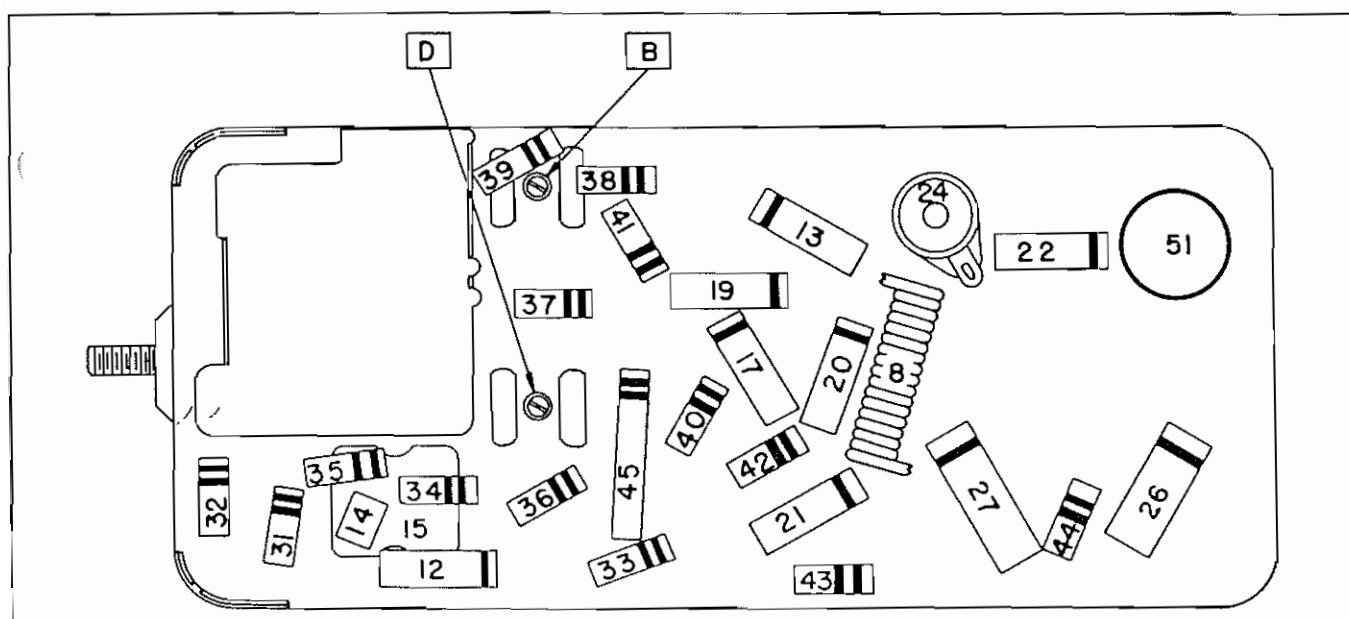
PARTS LAYOUT - BOTTOM VIEW - 987187 - RADIO
